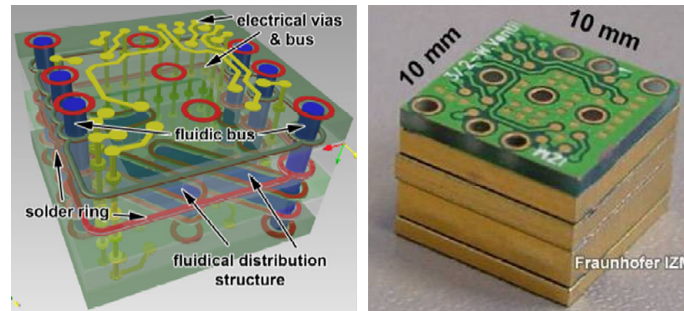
Stacked fluidic mini-PCB of the FRAUNHOFER IZM in Berlin, demonstrator of the MATCH-X technology [23].
